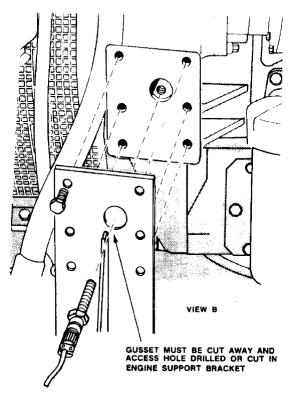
Magnetic Pickup Installation (location of magnetic pickup in installation pad on right side of flywheel housing)
